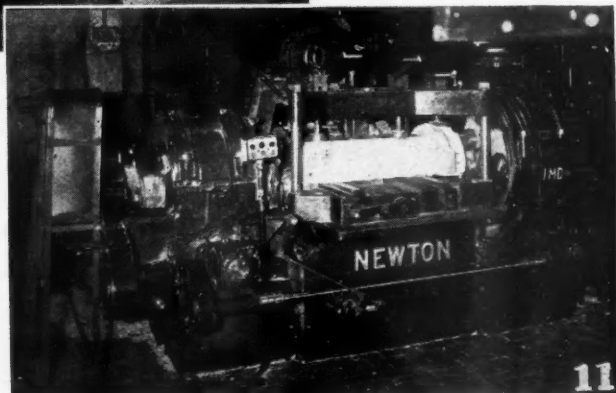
Type "C" Newton duplex planetary and sliding head miller
